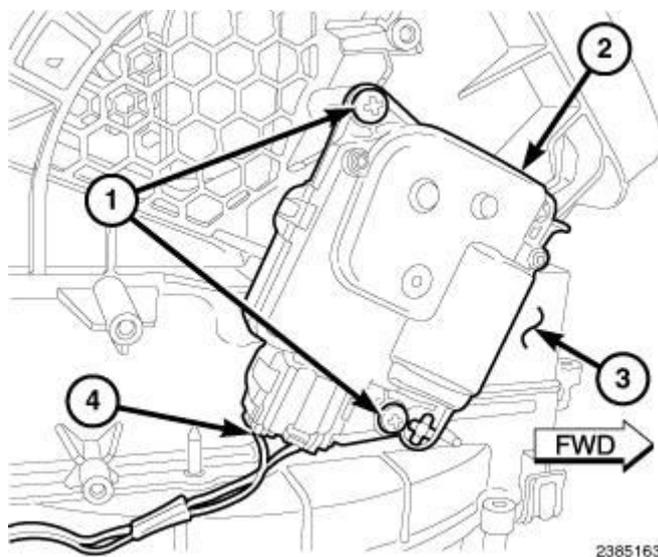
Recirculation Door Actuator, HVAC Air Inlet Housing, Wire Harness Connector & Screws
